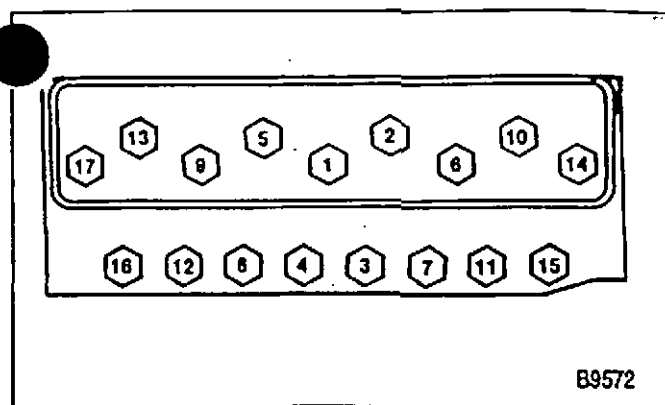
Cylinder Head Bolt Tightening Sequence (5.0L and 5.7L Engines)
